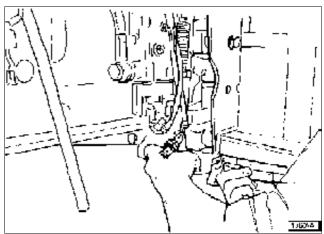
Detach the protective casing from the AGROSHIFT control valve assembly and disconnect the power leads from the solenoid valves (machines equipped with Agroshift only). Thereafter, disconnect the bowden cable from the handbrake lever mounted to the right hand side of the transmission.
